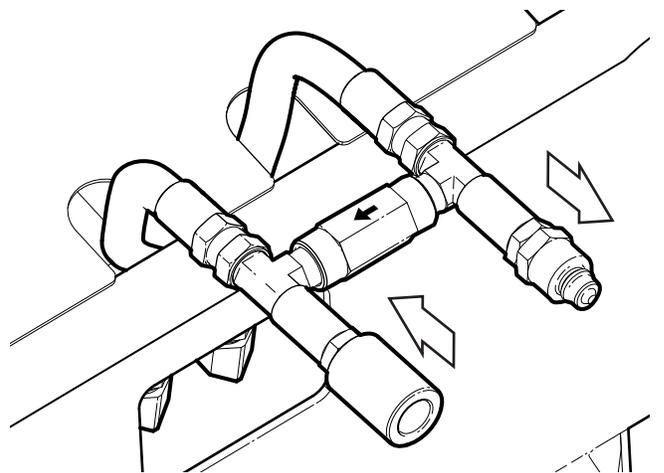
Hydraulic Connections—3/4" Flat Face Couplers
